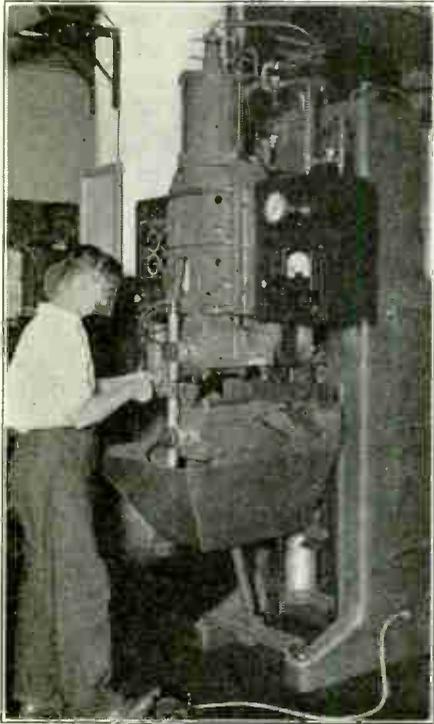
A spot and projection welding machine with timing adjustments on the panels in front of the machine. The electronic controls are mounted inside the welding machine.
